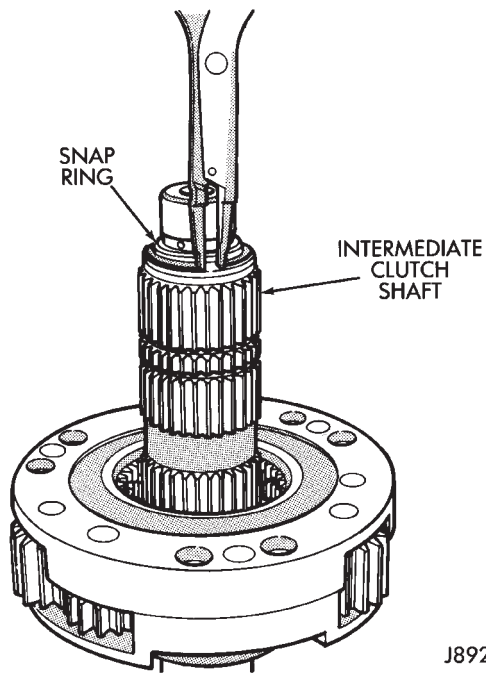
Removing Intermediate Clutch Shaft Snap Ring
